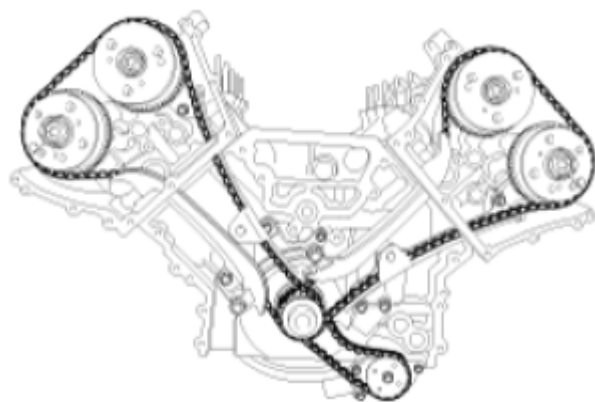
Identifying Timing Chain On CVVT Sprocket
